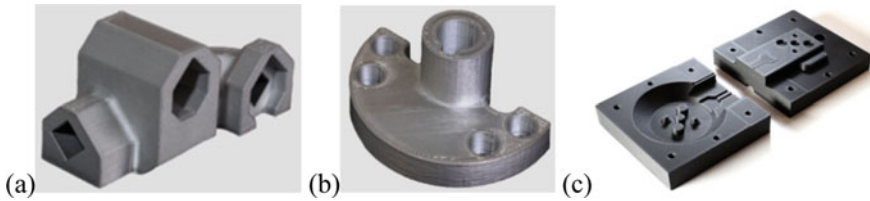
a One optimized end-use part (Source Markforged), b the Wheel shaft redesigned to be a three-part assembly (Source Markforged), c the Thermoset Mold tool for thermoset plastic (Source Markforged) [29]
